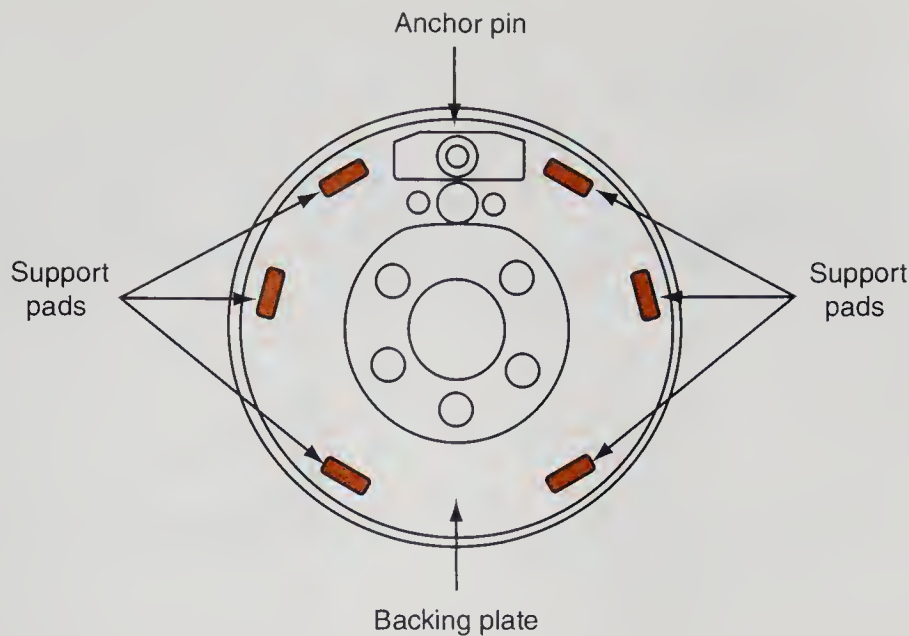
The backing plate holds the complete drum brake assembly. The shoe slides across the lubricated shoe contact pads as they are applied and released.
